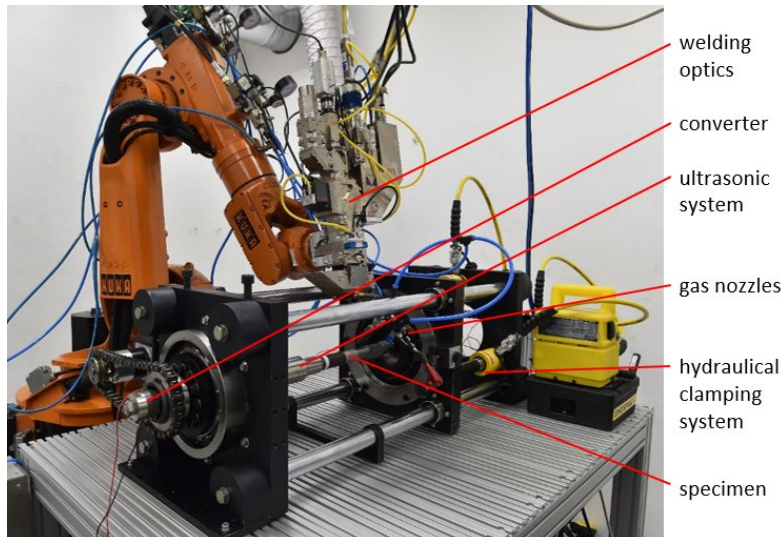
Experimental setup for ultrasonic assisted laser beam welding
